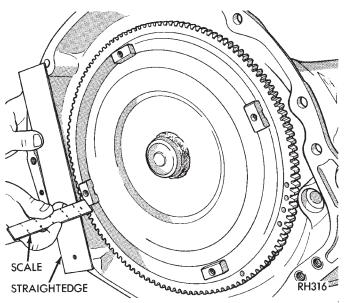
Checking Torque Converter Seating-Typical GEARSHIFT CABLE
